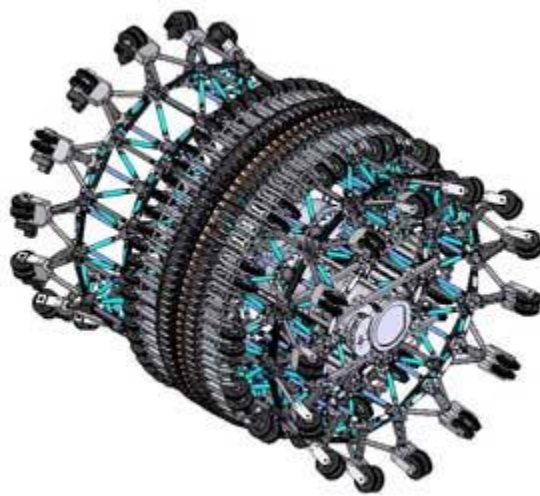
Typical MFL Tool (courtesy Pure Technologies)
